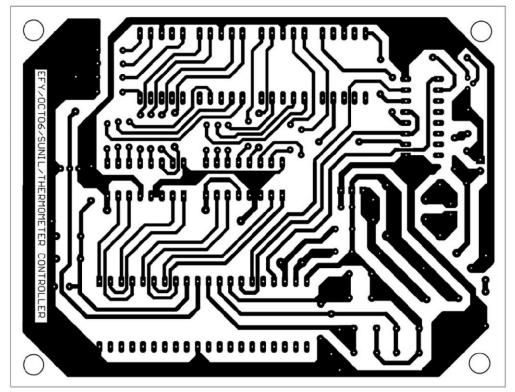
Actual-size, single-side PCB layout for digital thermometer-cum-controller
